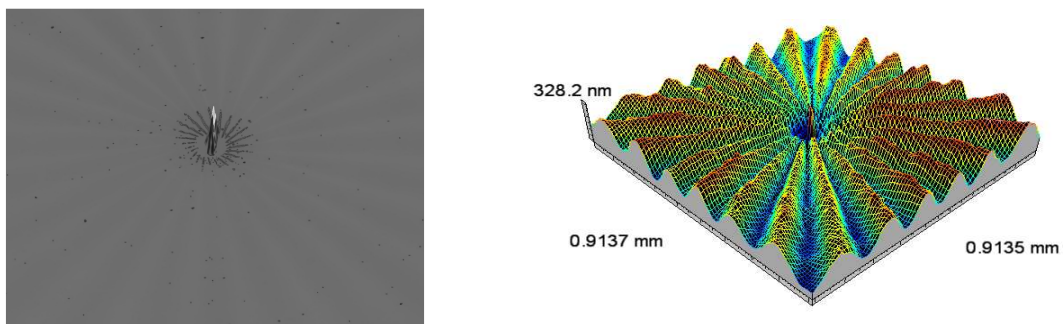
Surface error caused by uneven cooling of the machine or the part during fabrication; (Richard *et al.* 2003)
